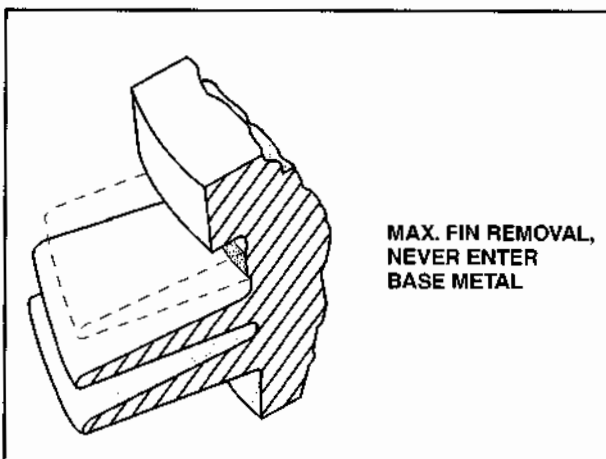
When repairing a damaged fin on a cylinder, you must not remove any of the primary cylinder casting. In addition, fin loss near spark plug openings or exhaust ports can cause dangerous local hot spots.
